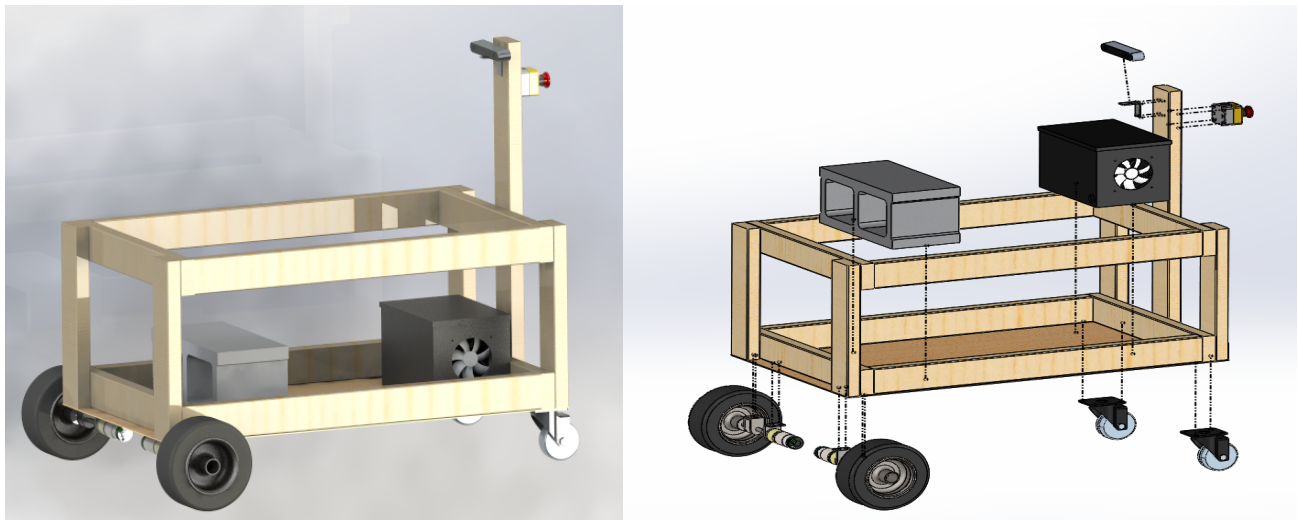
Prototype assembly (left) and exploded view of sub-assemblies (right)
